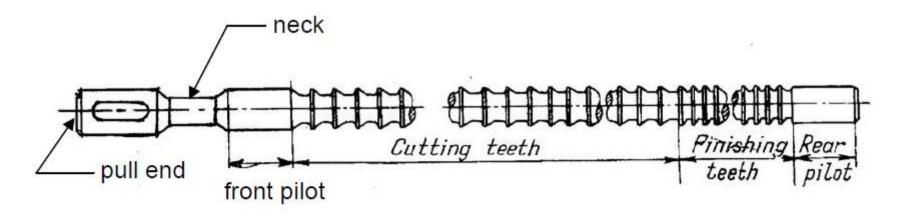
Configuration of a pull type broach used for finishing holes.
